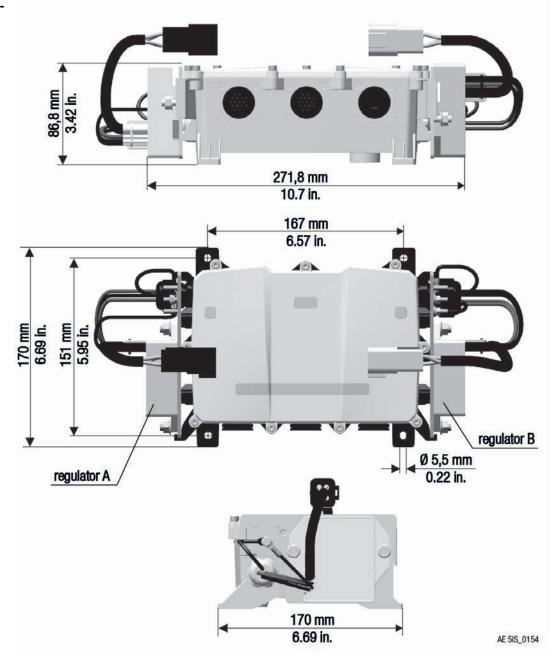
Fusebox – Connections and dimensions – TYPICAL
